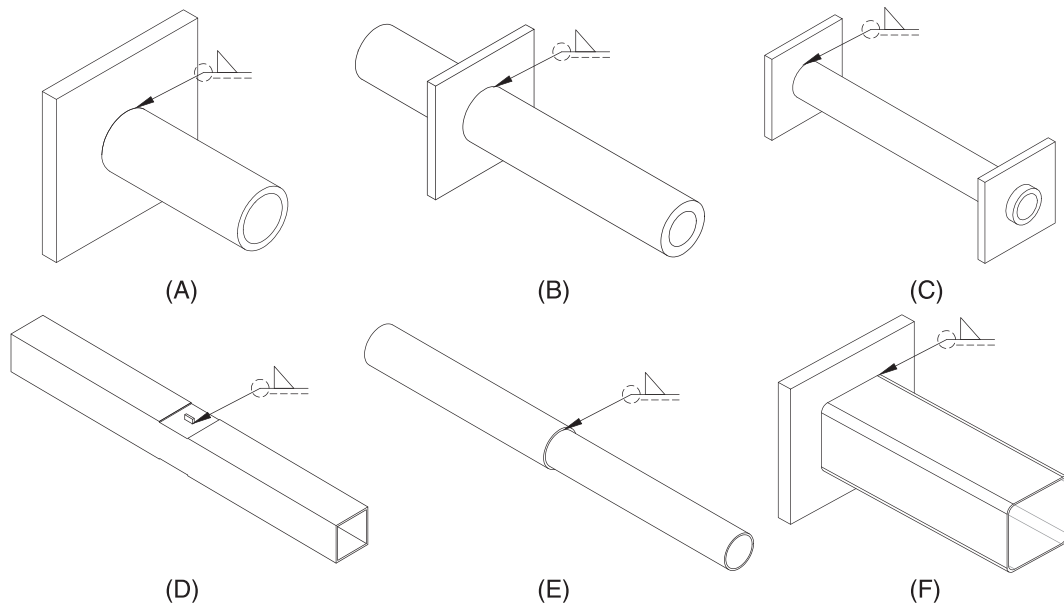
Geometries of the reviewed welded joints.
